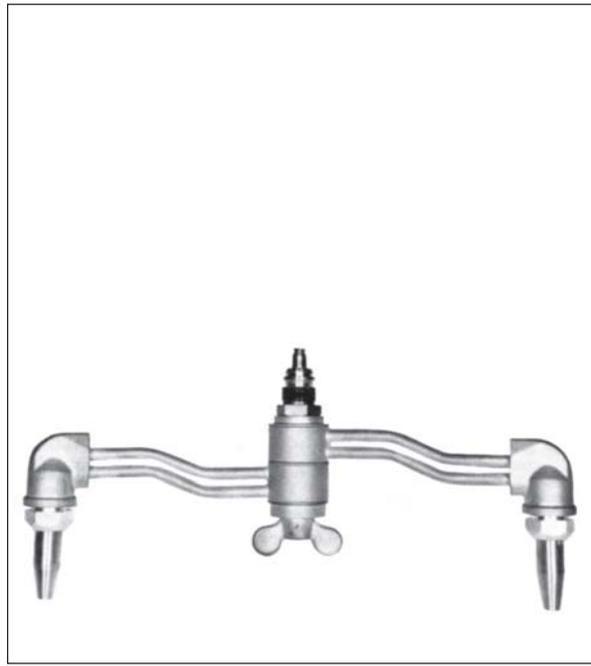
Two-Torch Setup Using Adjustable Slide and Clamp Assembly
